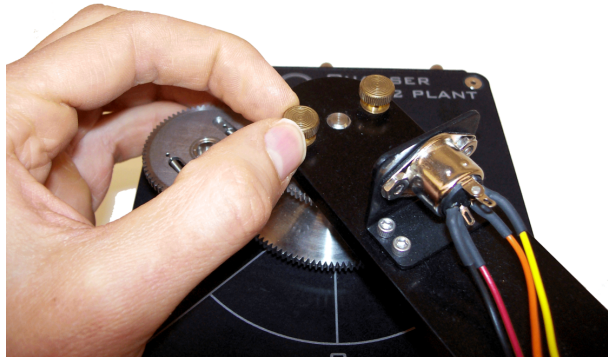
Mount arm on SRV02 output shaft and tighten thumbscrews
